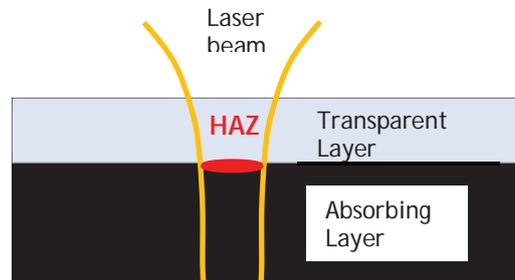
Laser transmission welding of two polymer sheets, comprising a laser-transparent upper layer, and an absorbing lower layer.
